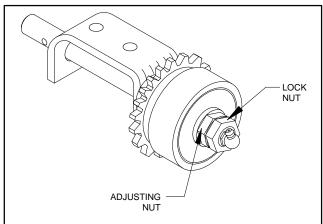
TORQUE LIMIT CLUTCH ADJUSTMENT
